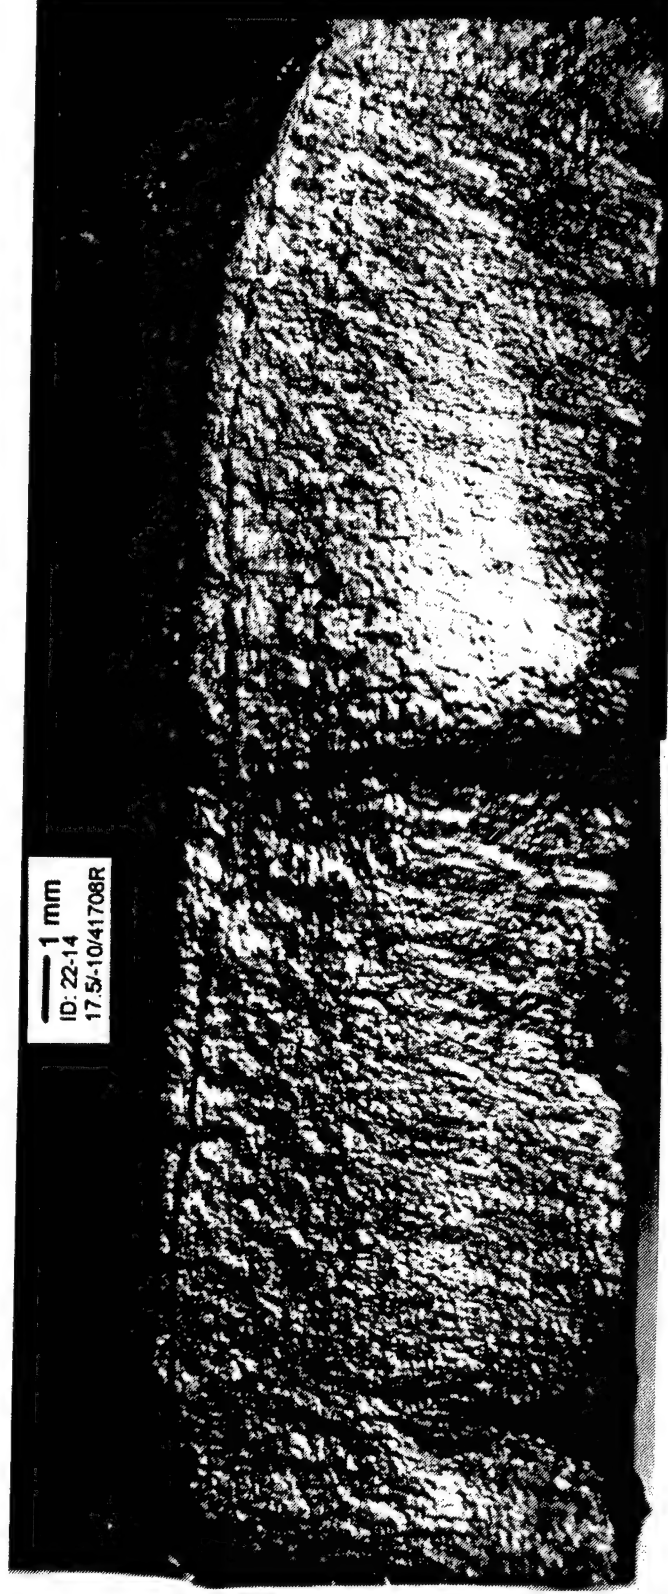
Fatigue fracture surface of the HSLA-80 but weld sample subjected to random loading:
